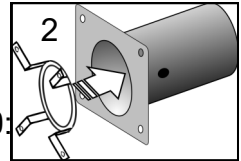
BOLT BURNER TO TUBE FLANGE
